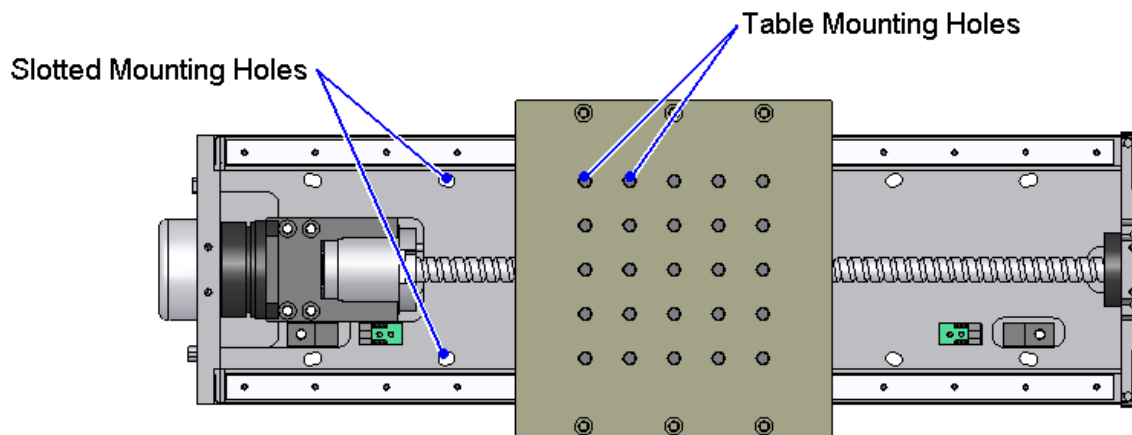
Top view of an ATS1100-H Stage Showing Mounting Holes
